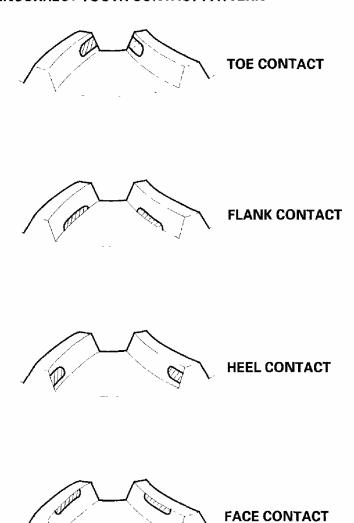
Checking Transfer Gear Tooth Contact Pattern Courtesy of AMERICAN HONDA MOTOR CO., INC.
